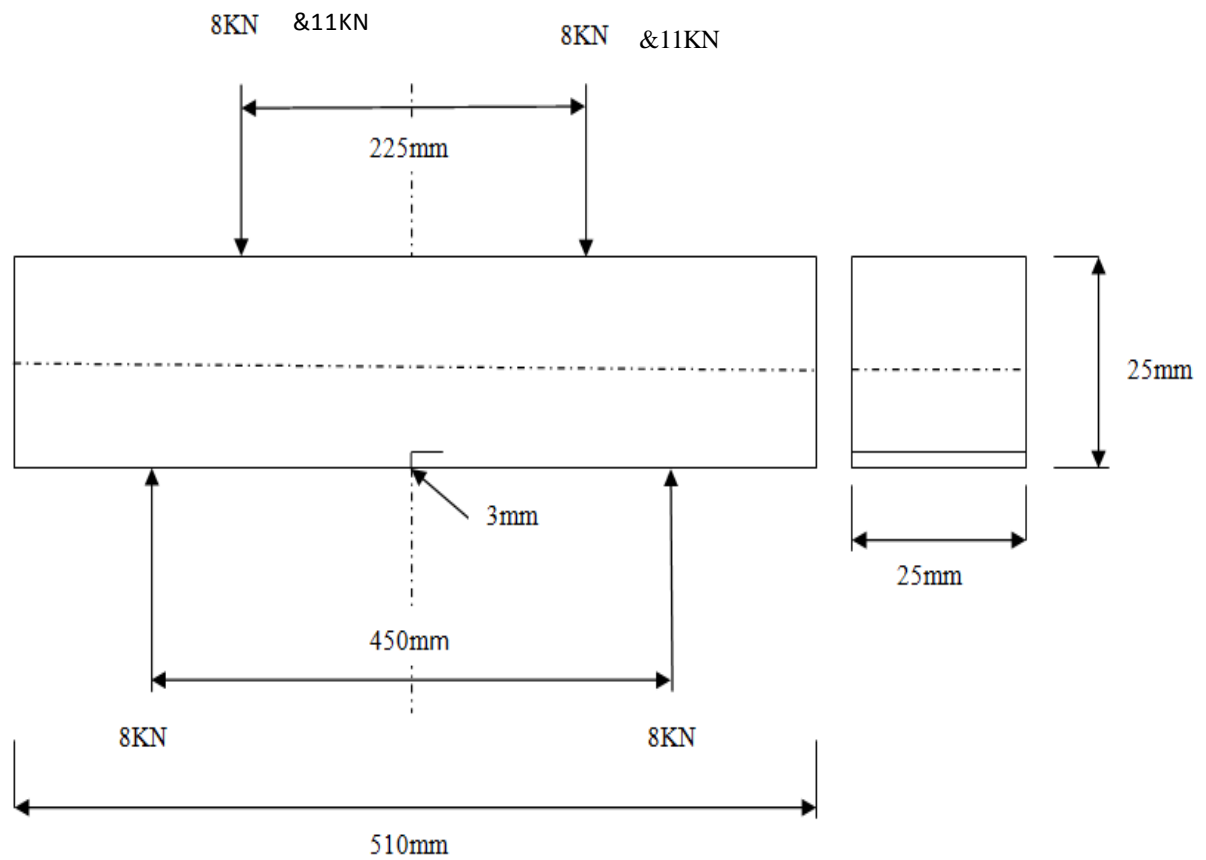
; Dimensions of beam specimen with straight notch at center
